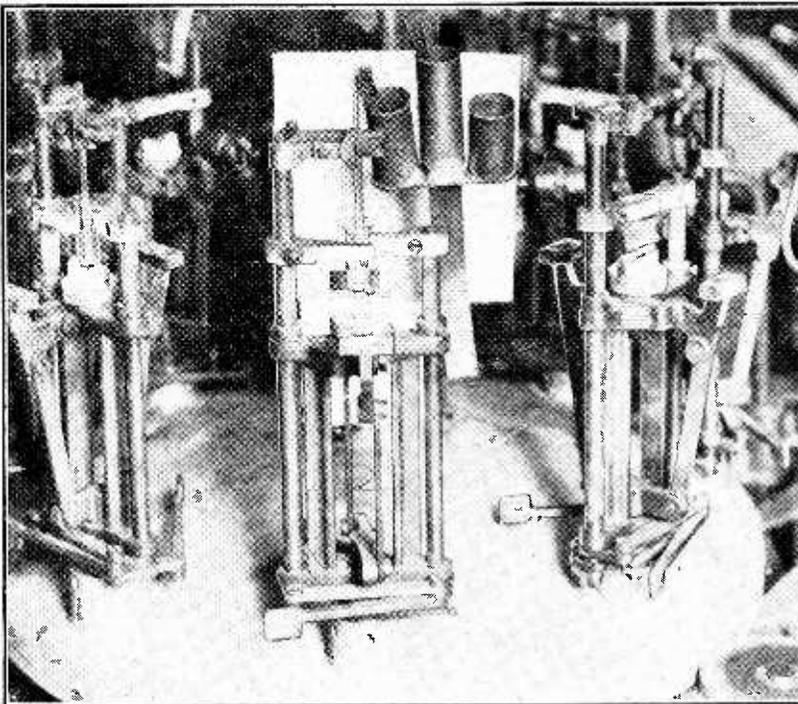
Machine at the Osram Works for shaping the glass foot and sealing the wires and supports
